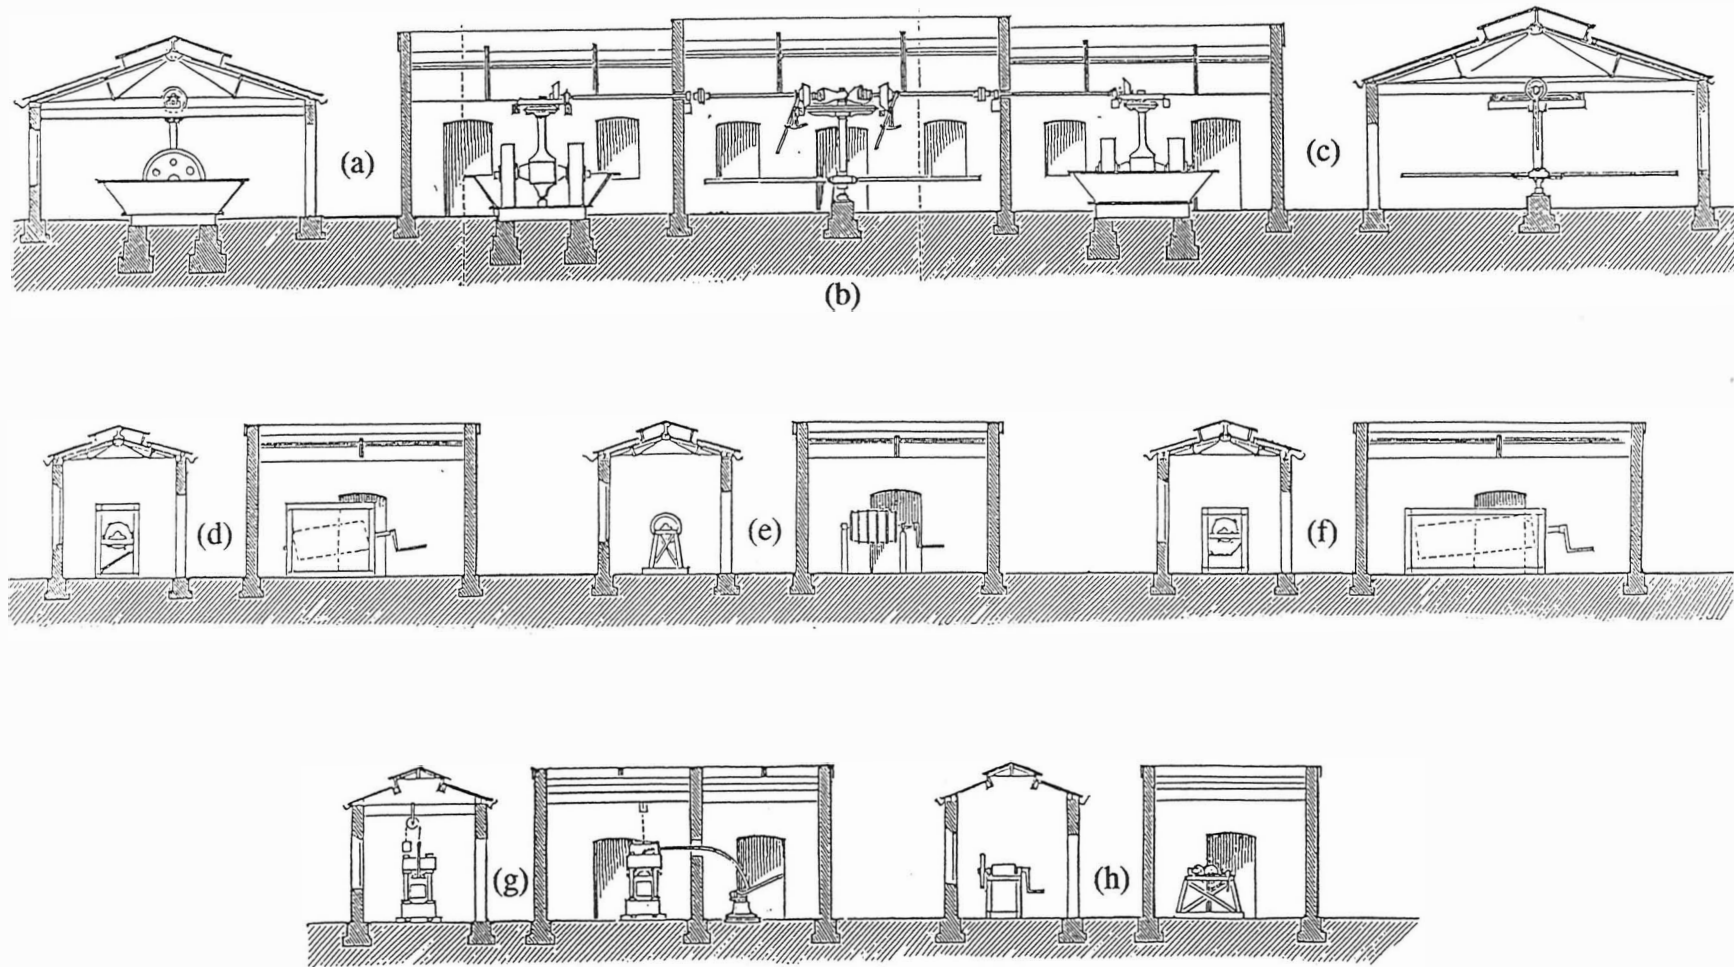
Gunpowder machinery manufactured by J & H Gwynne for the Japanese Government. (a) Pulverising mill. (b) Cattle track. (c) Incorporating mill. (d) Charcoal sifter. (e) Mixing barrel. (f) Glazing cylinder. (g) Hydraulic press and pump. (h) Breaking down cylinder.
